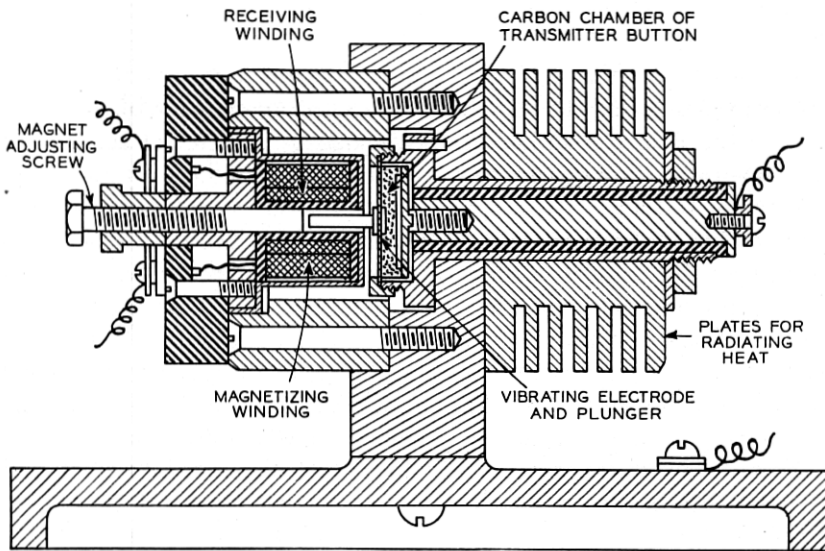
Cross-sectional drawing of a mechanical type of telephone repeater.
